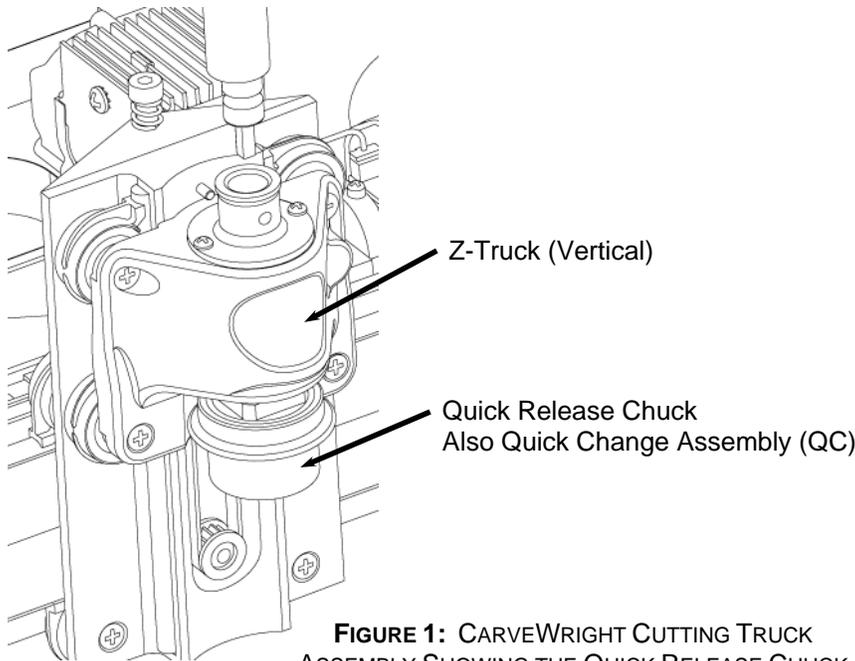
CARVEWRIGHT CUTTING TRUCK ASSEMBLY SHOWING THE QUICK RELEASE CHUCK
